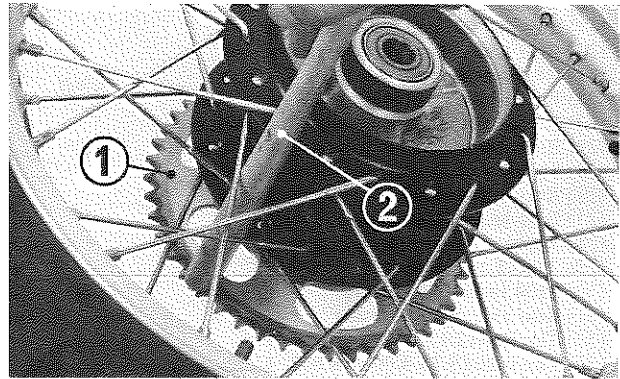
(1) Driven sprocket (2) Wooden block
